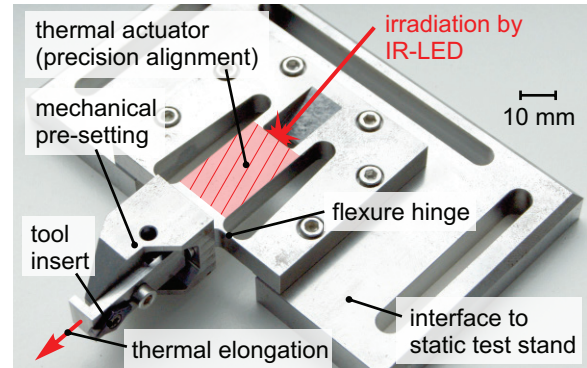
Tool holder for thermal alignment of diamond cutting edges on a static test stand
